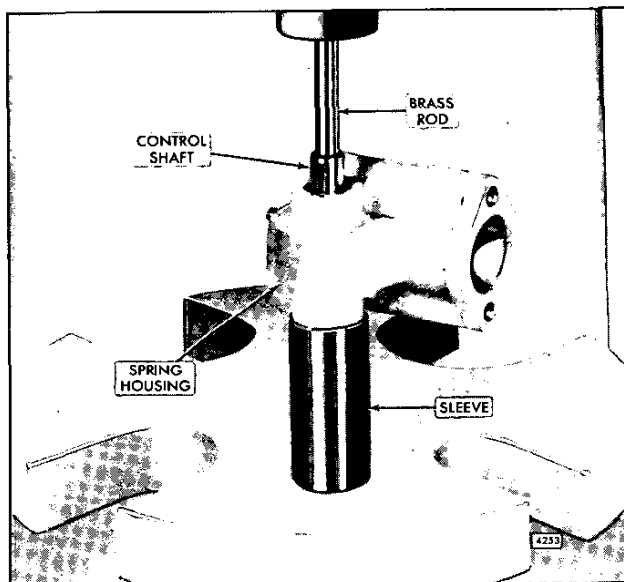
Removing Shaft and Bearing from Spring Housing
